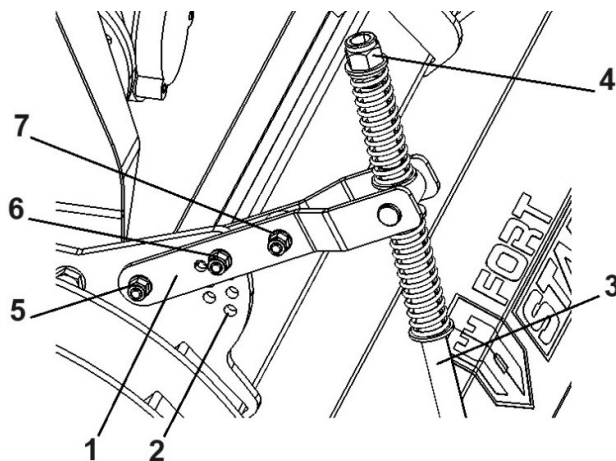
Adjustment of the Rear Guard Position: 1 – bracket, 2 – adjustment holes, 3 – adjustment rod with springs, 4 – clamping nut, 5 – nut “A”, 6 – nut “B”, 7 – nut “C”.
